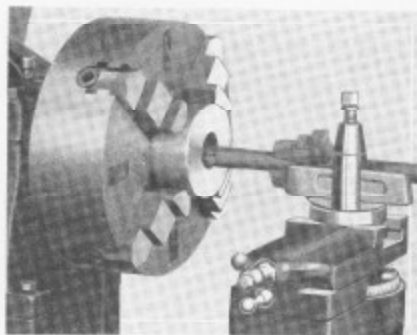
Making a Bearing Adapter for Use on a Straight Mandrel
